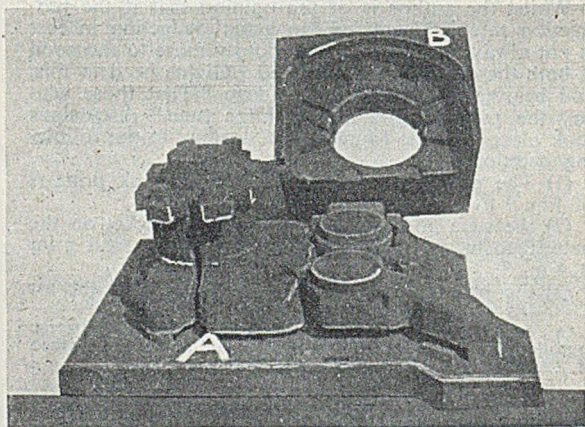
PART ASSEMBLY OF CYLINDER COVER CORES.
